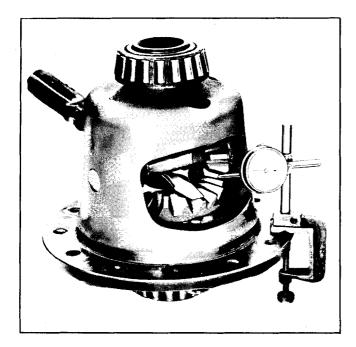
B-9 Checking Pinion Gear to Side Gear Clearance - B Series - "O" Axle
